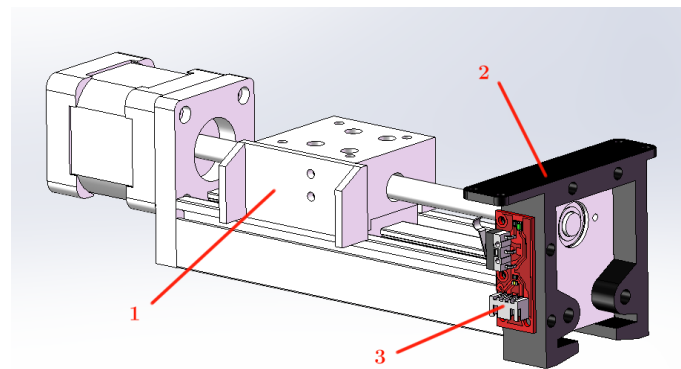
Design of Endstop system, 1. Endstop trigger mechanism mounted on the platform, 2. 3D printed structure for mounting Endstop and further structures, 3. Endstop
